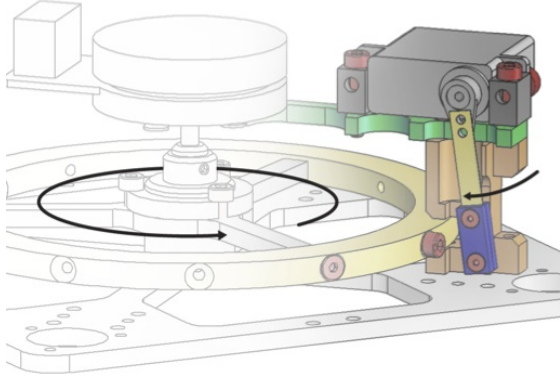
The CAD drawing of the RC servo-based braking mechanism: An RC servo is used to quickly collide a metal barrier (blue) with the bolt head (red) attached to the momentum wheel.
